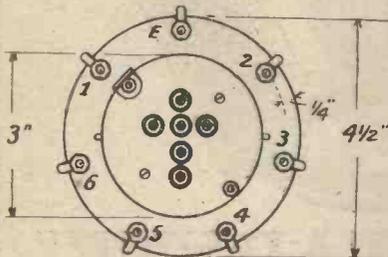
To conform to the standard arrangement the terminals should be marked as shown.
